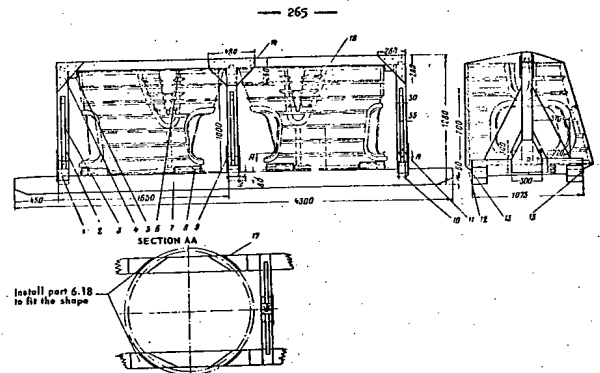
CARCASS PACKING FOR ENGINE NACELLE REAR ADAPTER
